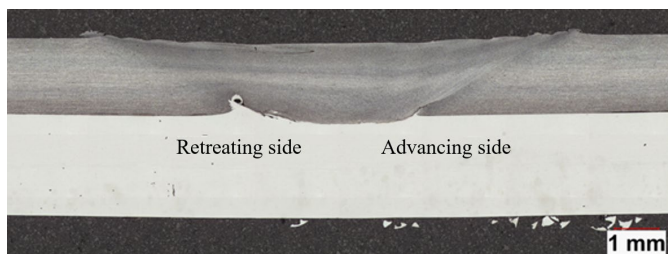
A5083-H19/SS201LN ¼ hard lap weld, advancing speed = 0.75 m/min, rotational speed = 750 RPM, axial force = 15 kN
